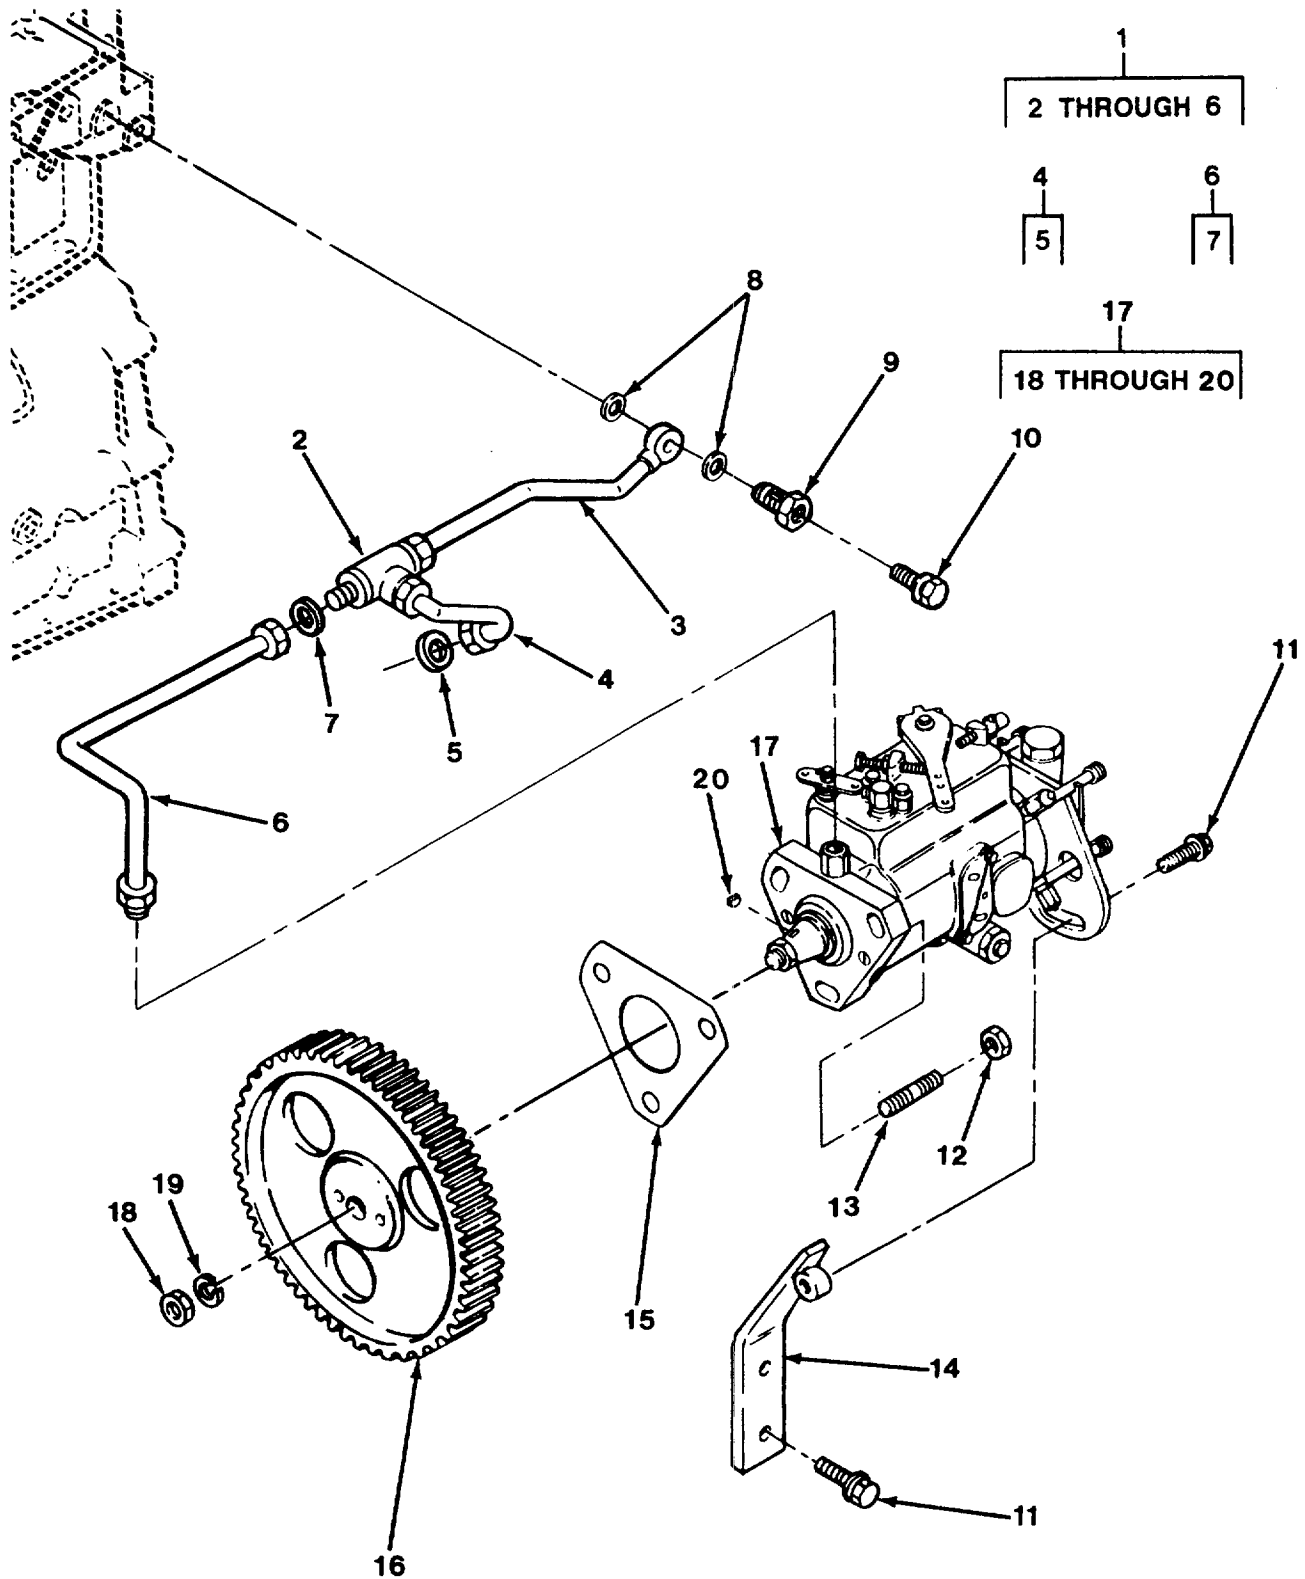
FUEL INJECTOR PUMP LINES AND DRIVE GEAR
